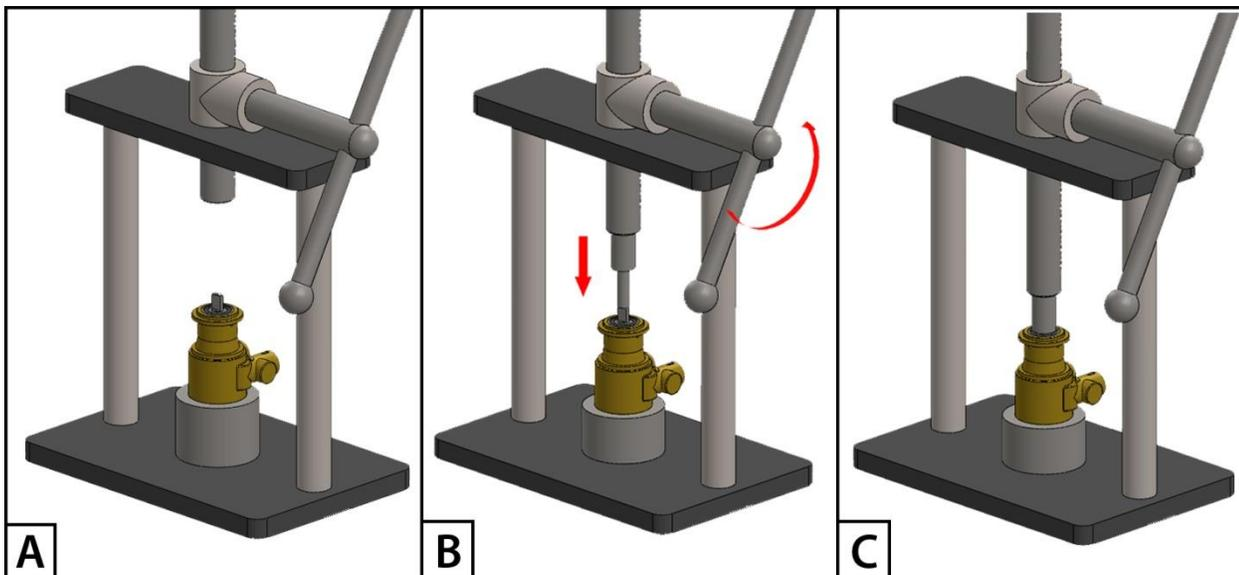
Diagram illustrating the tasks required to carry out Step 2.2.
